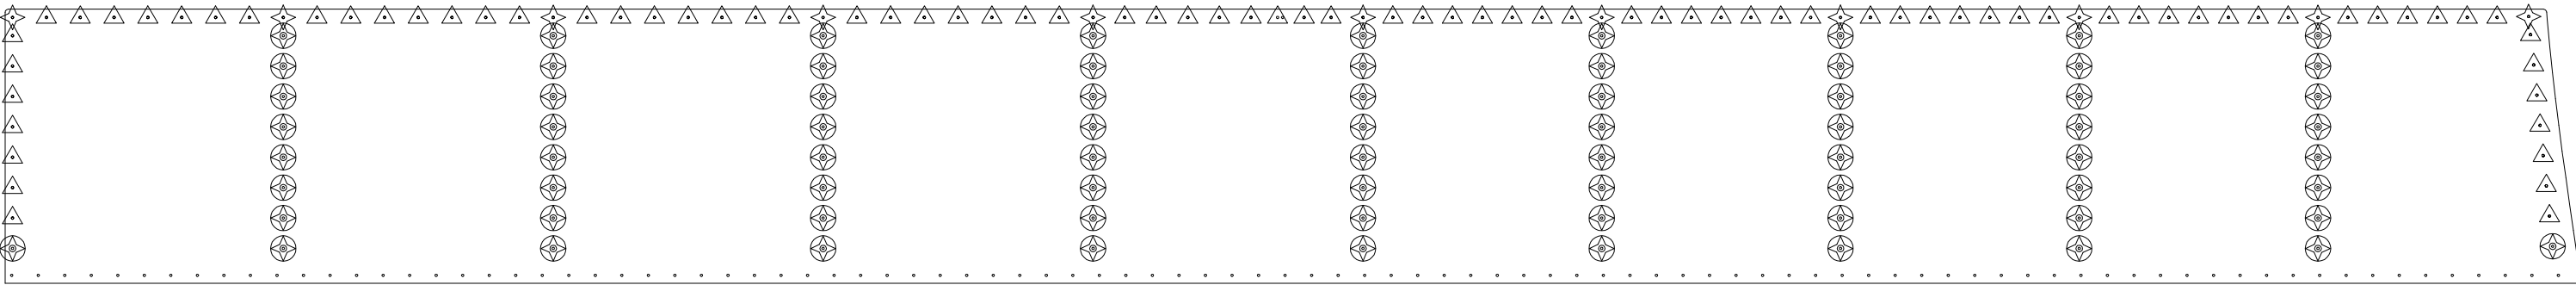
FL-1002 BOTTOM SKIN RIVETS
